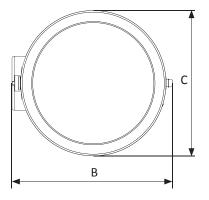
Dimensions of the BA-ST 750-9100-FE storage tanks.
